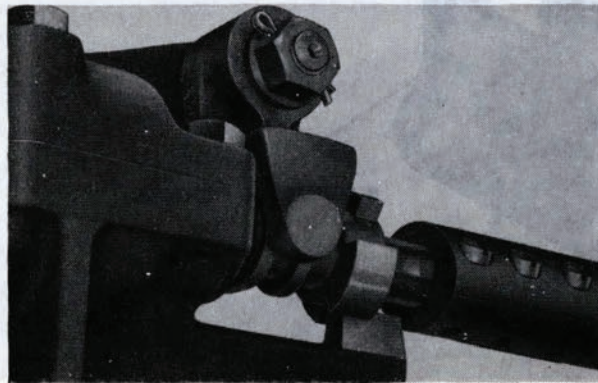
Index Collar Position—HIGH Speed—Spindle OUT—Operating Shaft Locked.
